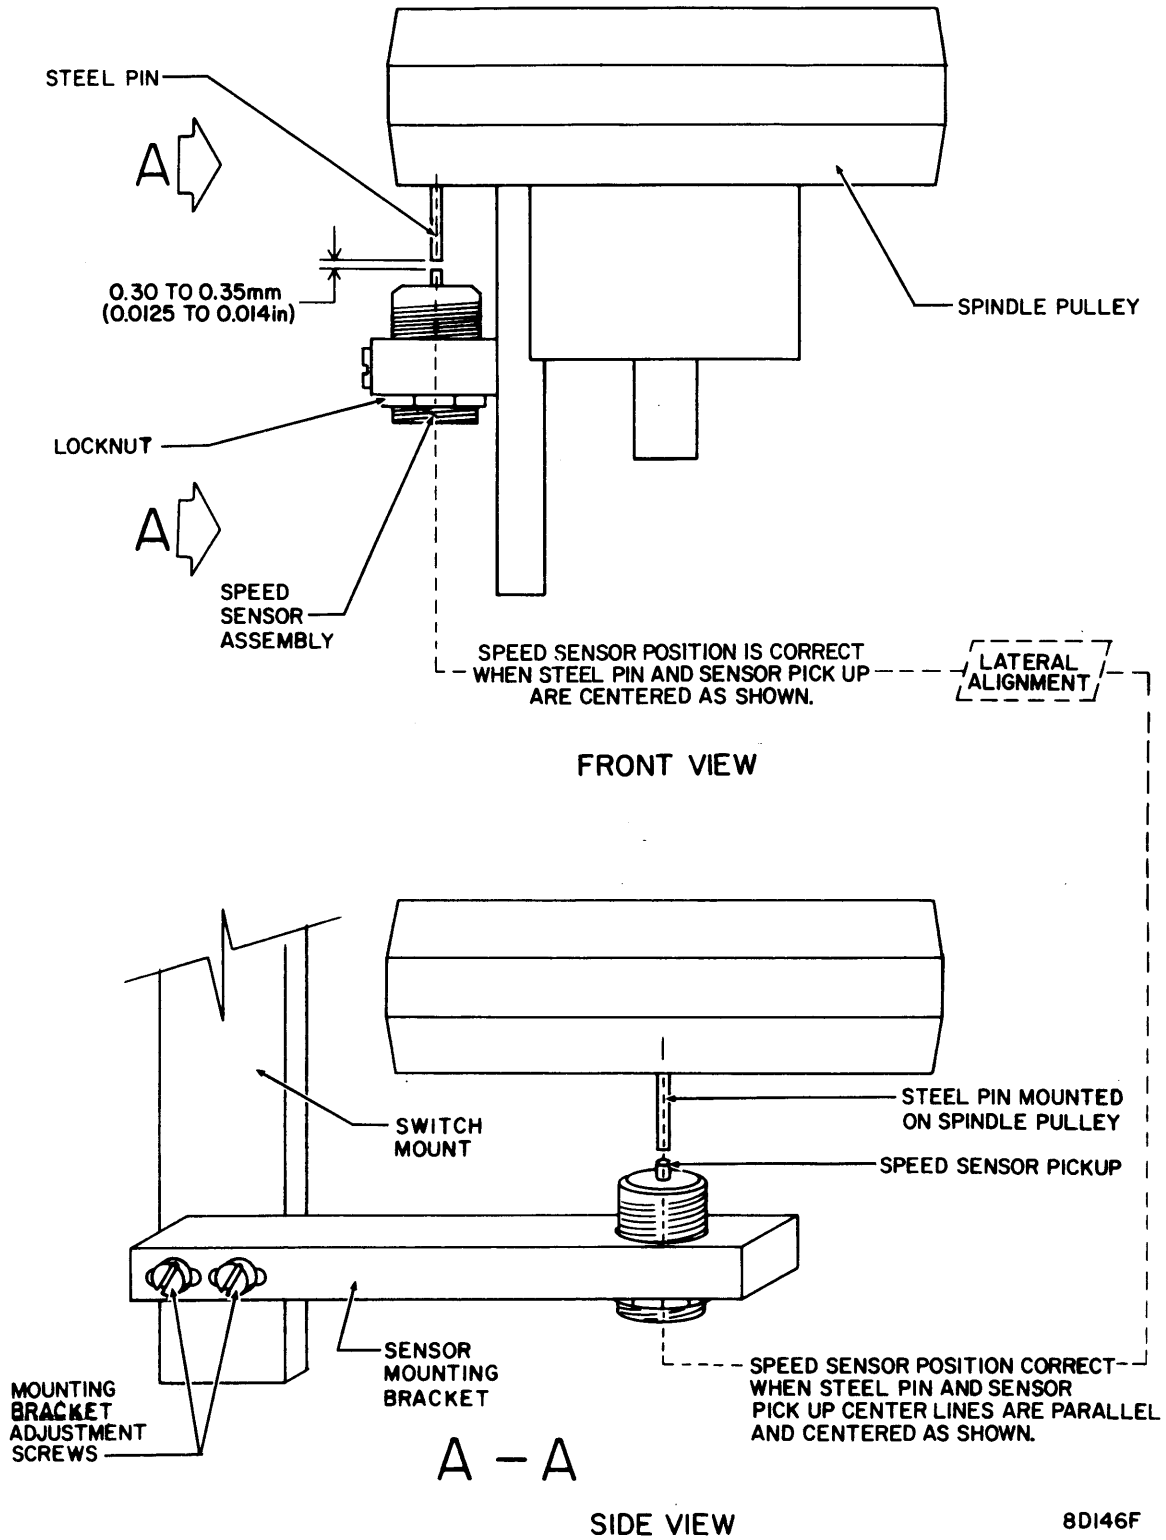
Speed Sensor Assembly Adjustment (S/C 08 and Below)
